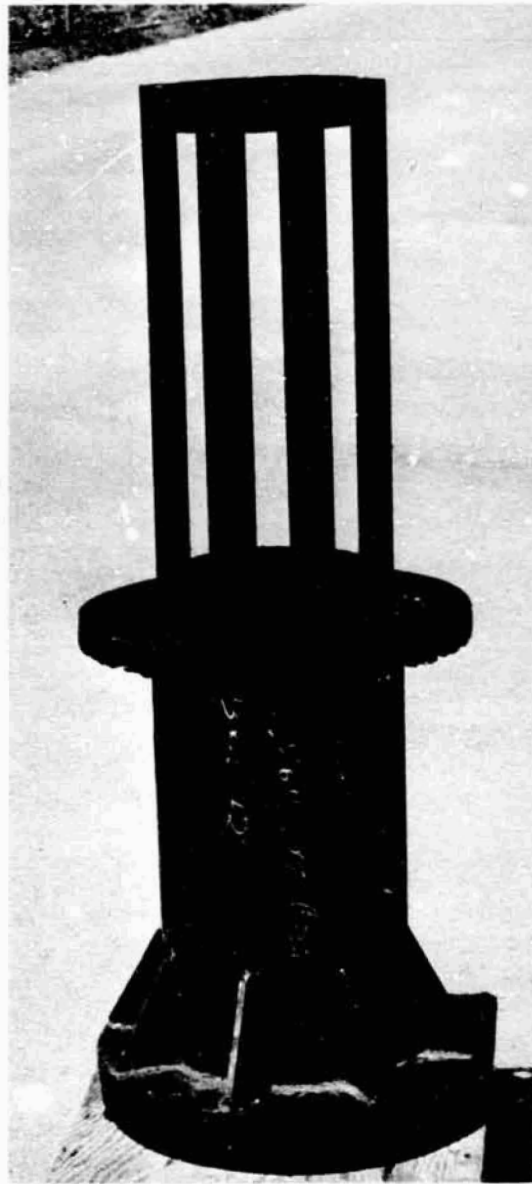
Stacked Assembly of Support Grid Rings Covered with Heavy Wire Mesh, Bed Diameter Insert, and Spacer
